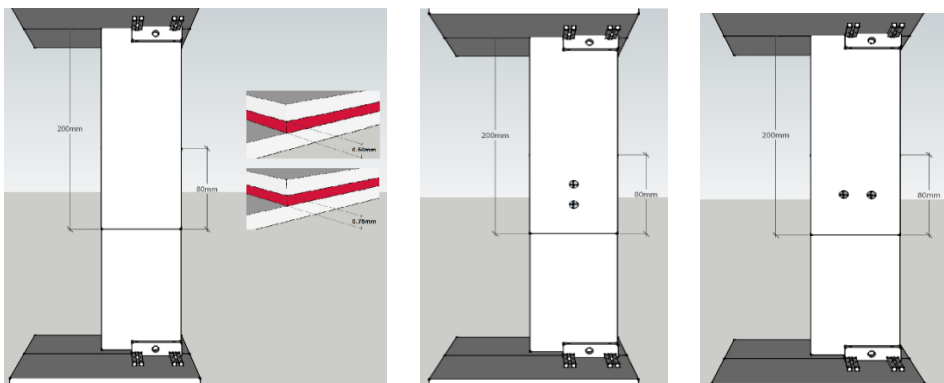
Schematic diagrams Adhesive and Screw specimen under test loading
